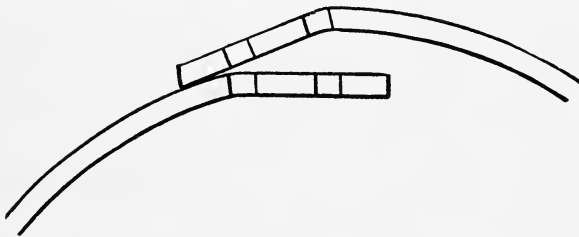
If bent after punching, plates will bend along a line of rivet holes.
